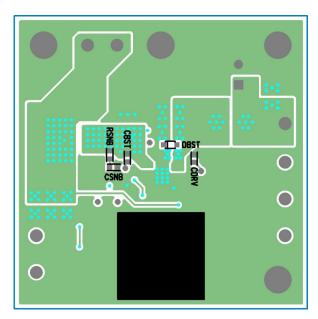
NCV891334MW50GEVB PCB Layout - Bottom
